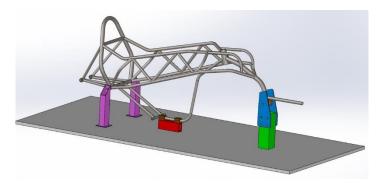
Second stage frame jig layout on welding table, solid model.
